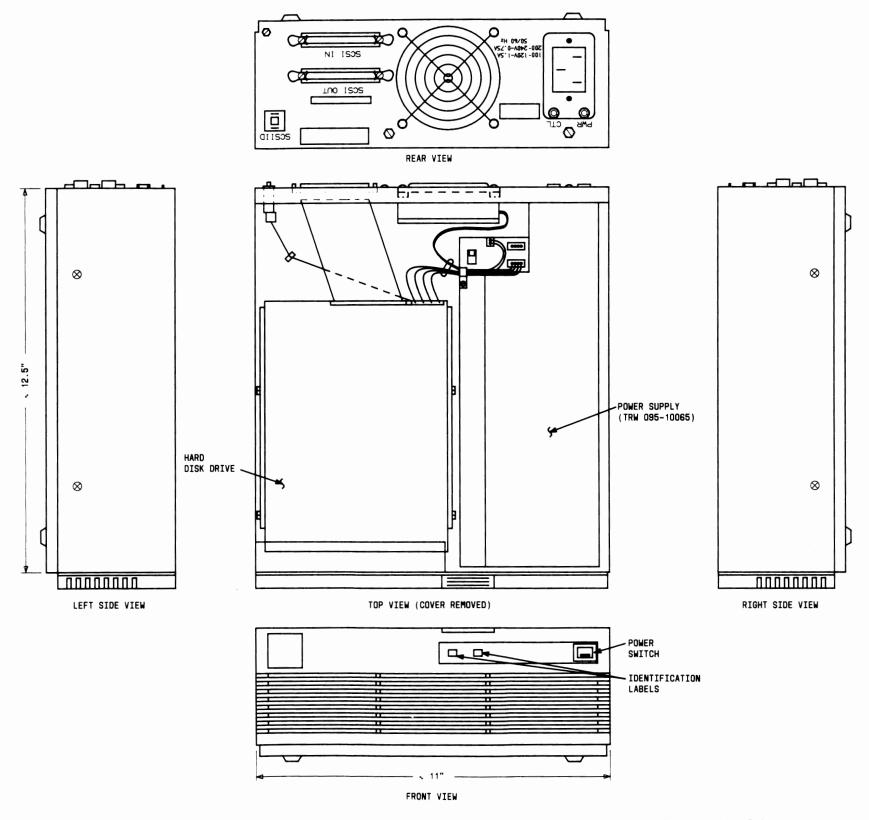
AT&T DM/S or DM/DS Cabinet Assembly Drawing (ED-3T011-30, G8, G9, G11)
